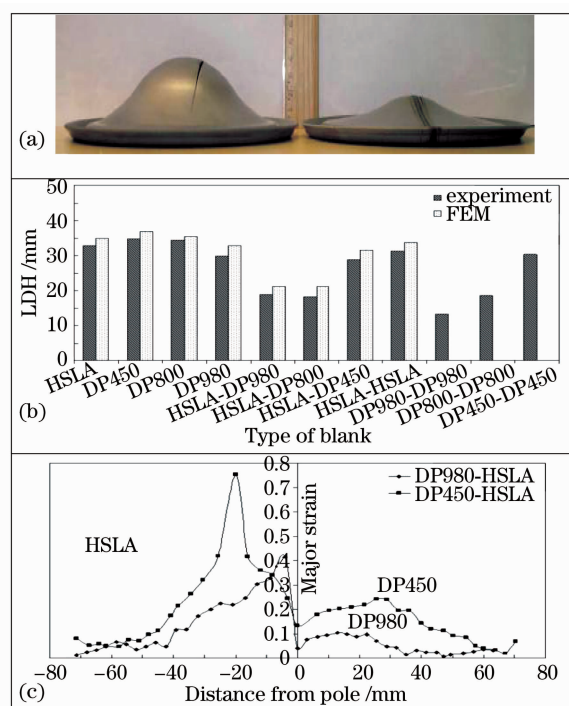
Formability of laser welded blank. (a) biaxial stretch formed DP980 laser welded blank and monolithic unwelded DP980 blank<sup>[29]</sup>; (b) comparison of LDH of parent metals and diode laser welded blanks obtained from experiment and FEM simulation<sup>[31]</sup>; (c) comparison of strain distribution on two deformed TWBs of dissimilar material combination<sup>[31]</sup>
